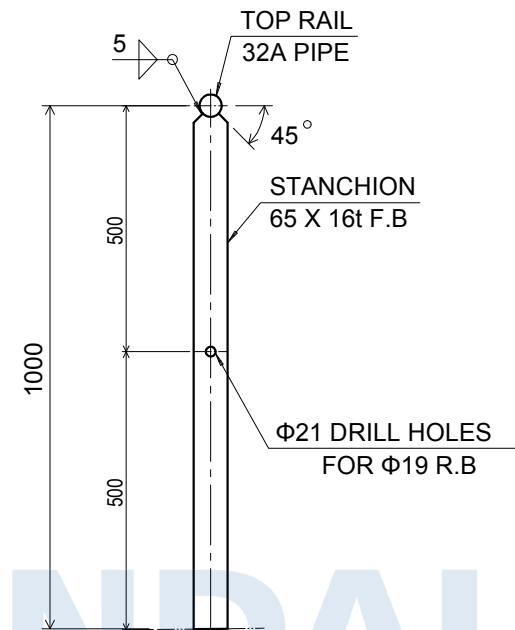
DETAIL OF HANDRAIL STANCHION (COMPANION TOP 적용)			SHIP NO. 8020 / 8021	04
